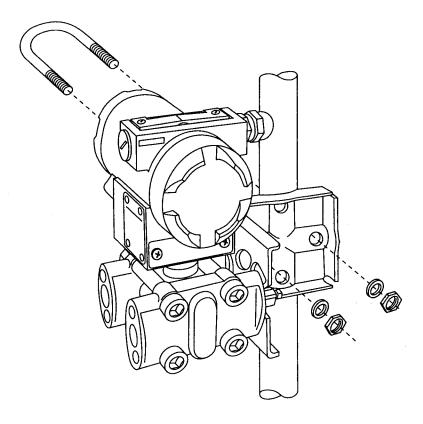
Fixing the SITRANS P transmitter using a mounting bracket (horizontal pressure pipes)
